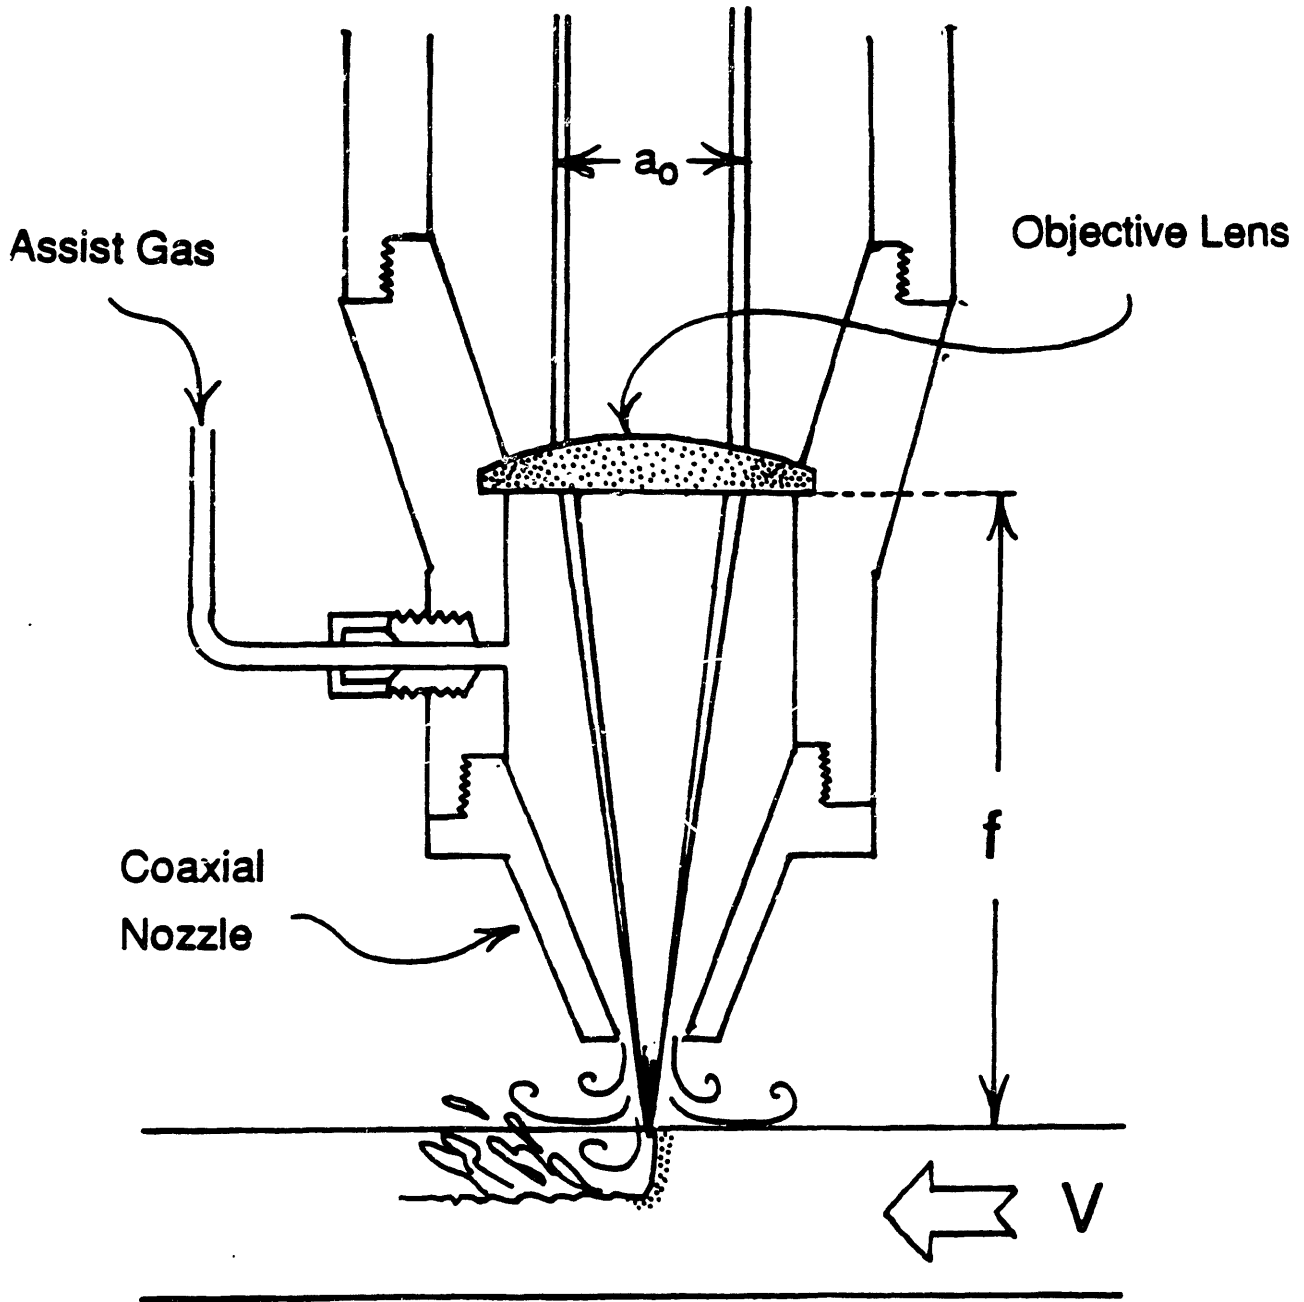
Coaxial nozzle configuration used in conventional laser machining.
